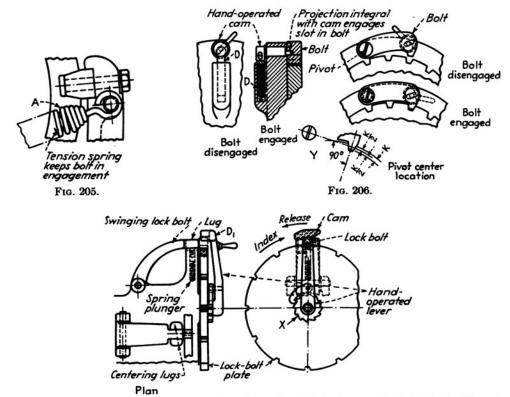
By using a lock-bolt plate larger than the work, the indexing error is diminished. The swinging lock bolt is released automatically by the spring plunger, which has a predetermined movement, when the hand-operated lever is moved to the left, as shown by the arrow marked Release, and the cam contacts the rounded top surface of the lock bolt. The ratchet is keyed with the lock-bolt plate to the spindle. As the lock bolt is released and the lever is rotated 30 deg. counterclockwise, the pawl engages the next tooth in the ratchet wheel at X. The lever is then pulled in the direction of the arrow marked Index, the cam moving the lock bolt downward into the next opening in the lock-bolt plate. The plan view of the bolt shows the two centering lugs between which the lock bolt is additionally supported.
